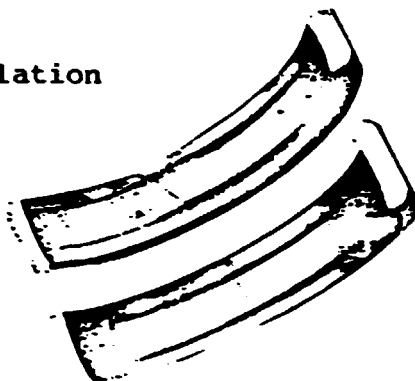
cut outer ring of an ovaly distorted self-aligning roller bearing with the opposite damage points at both running marks.
